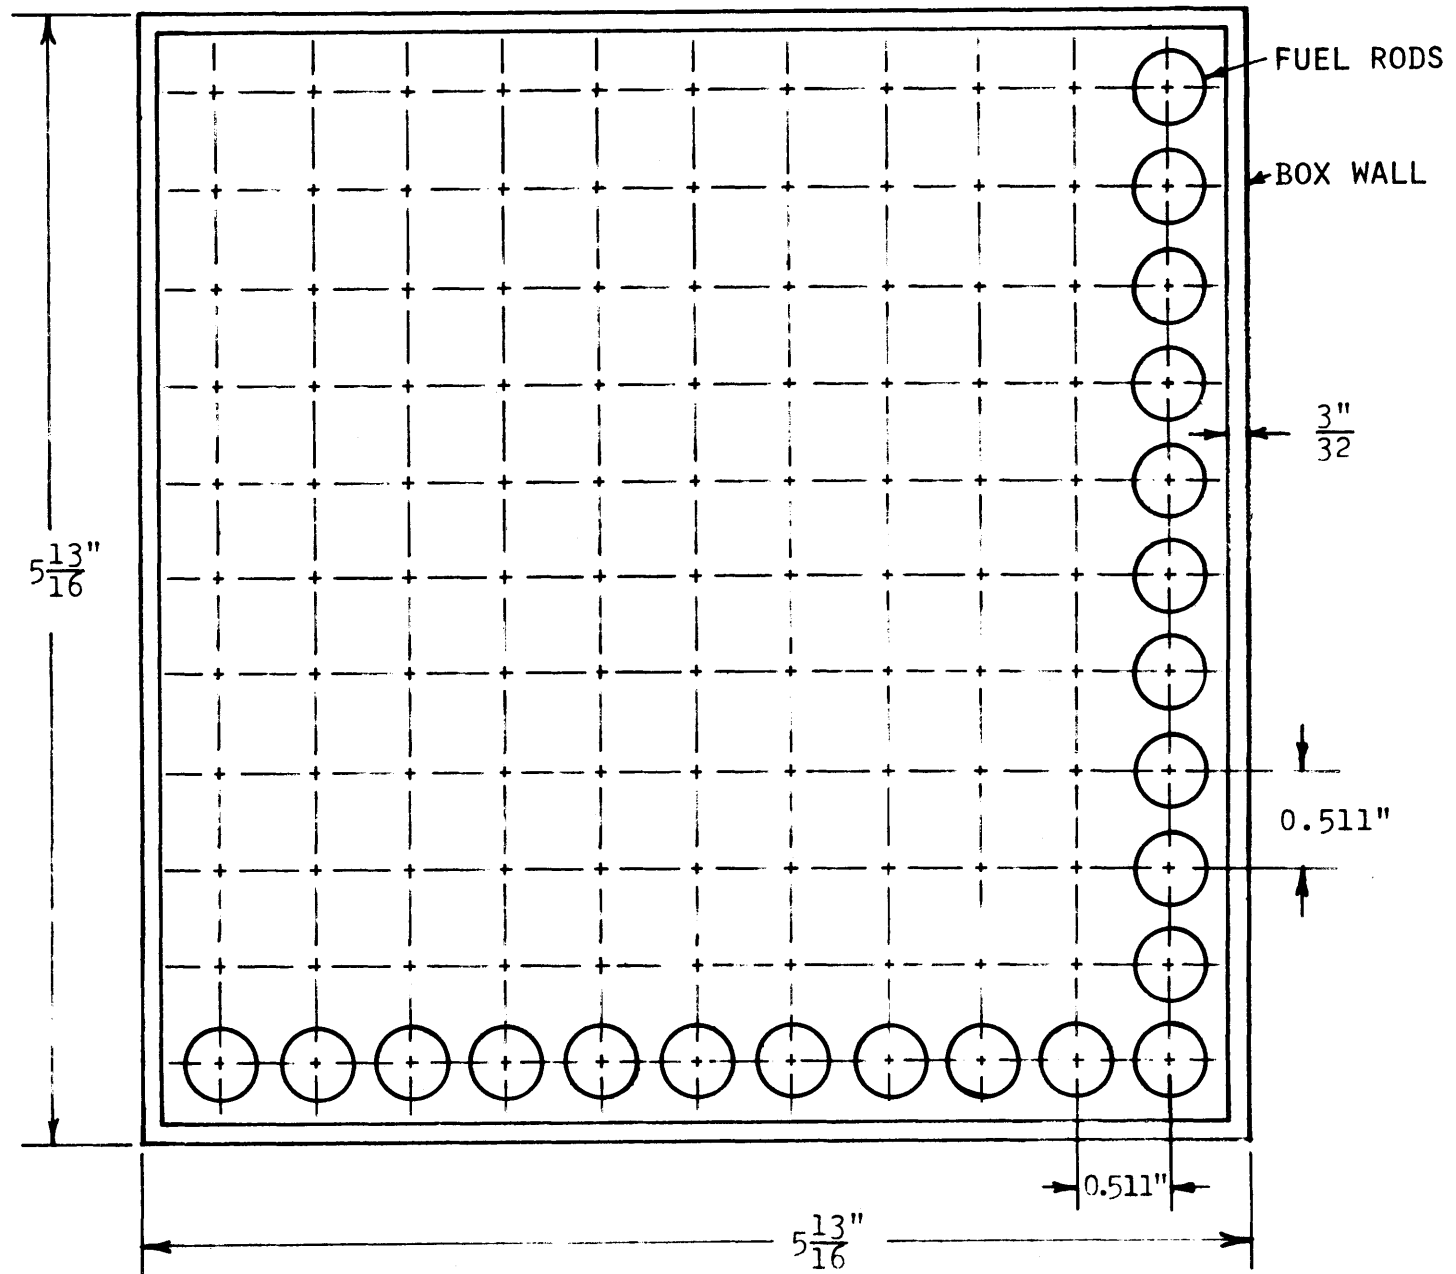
OVERHEAD VIEW OF BLANKET MOCK-UP NO. 3
